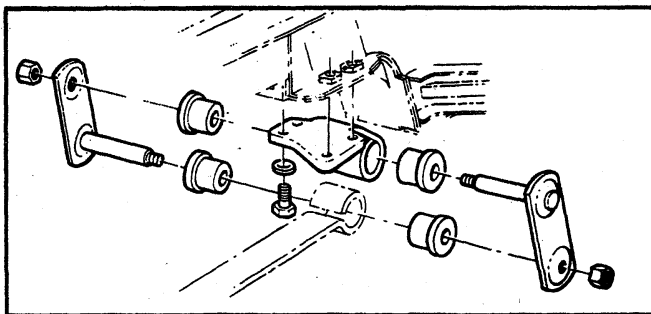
Rear Spring Shackle Exploded View—Station Wagon (Chevy II)
